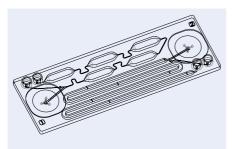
Schematic drawing of blister test chip Fluidic 522. Blister position 1 being left and position 2 being right.
